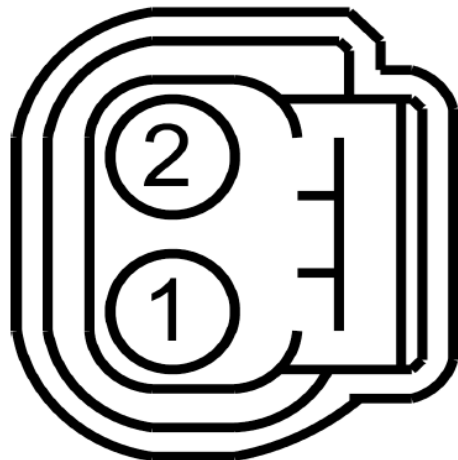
Crankshaft Position Sensor Connector End View (C1120)
